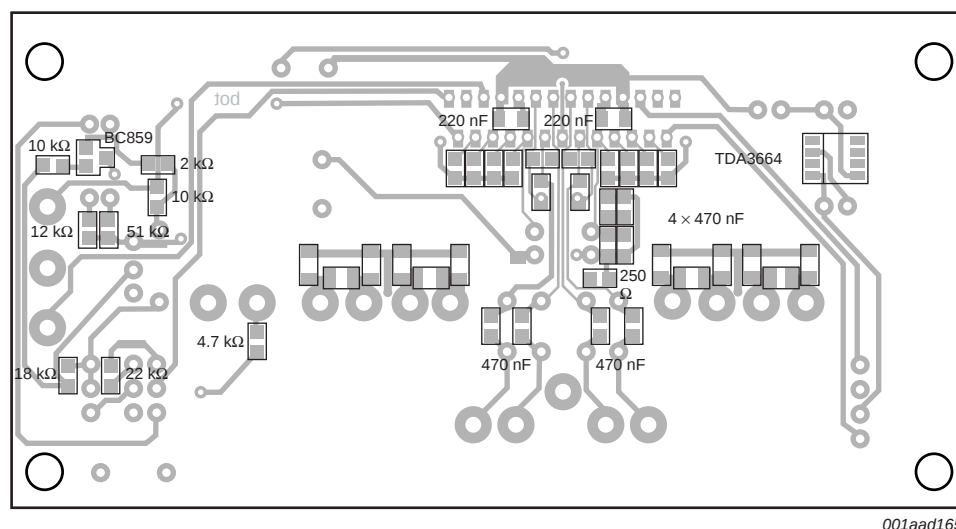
PCB layout of test and application circuit; components bottom (top view)
